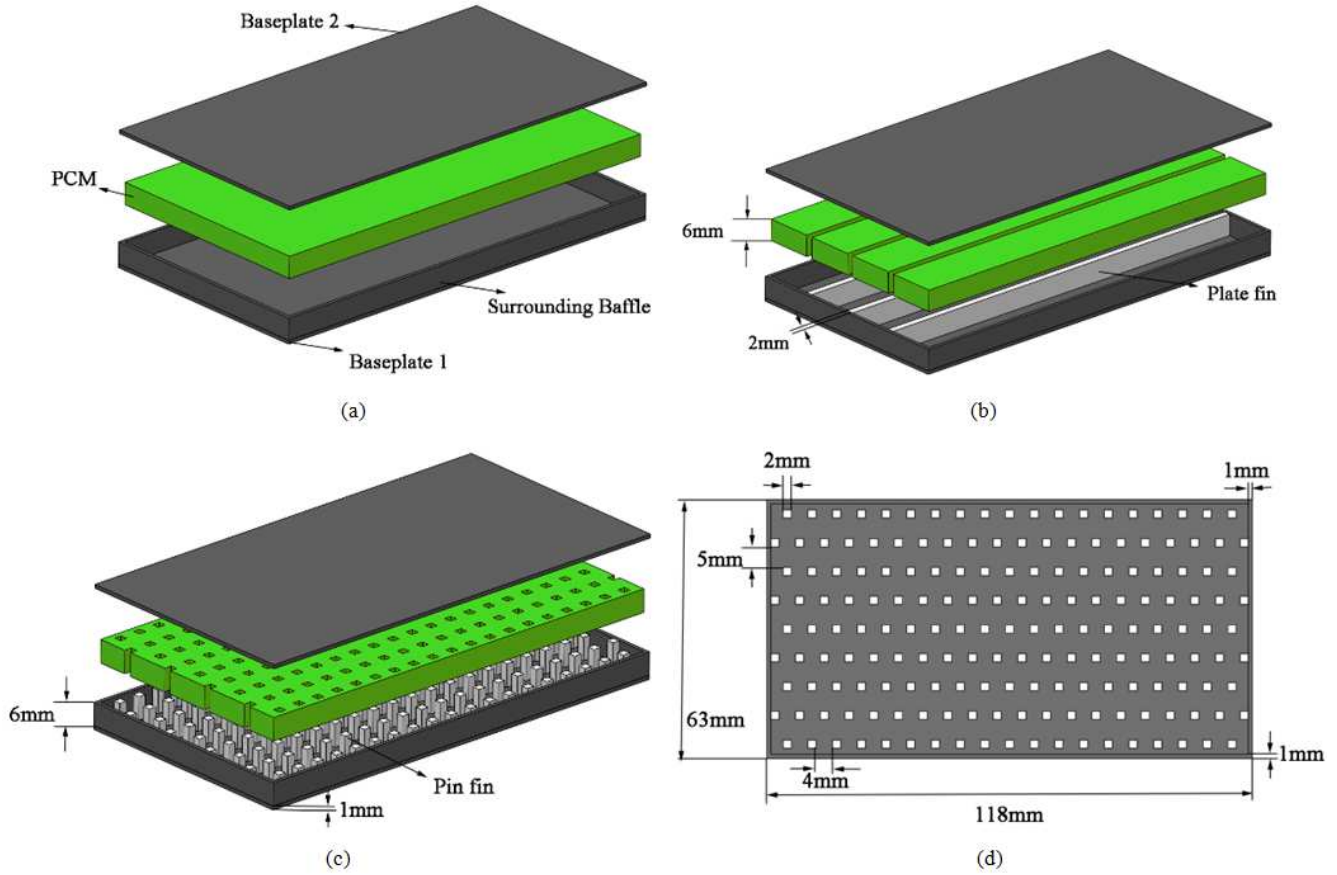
Schematics of heat sinks: (a) pure PCM; (b) plate fin; (c) pin fin. (d) Detailed dimensions of the pin fin.
